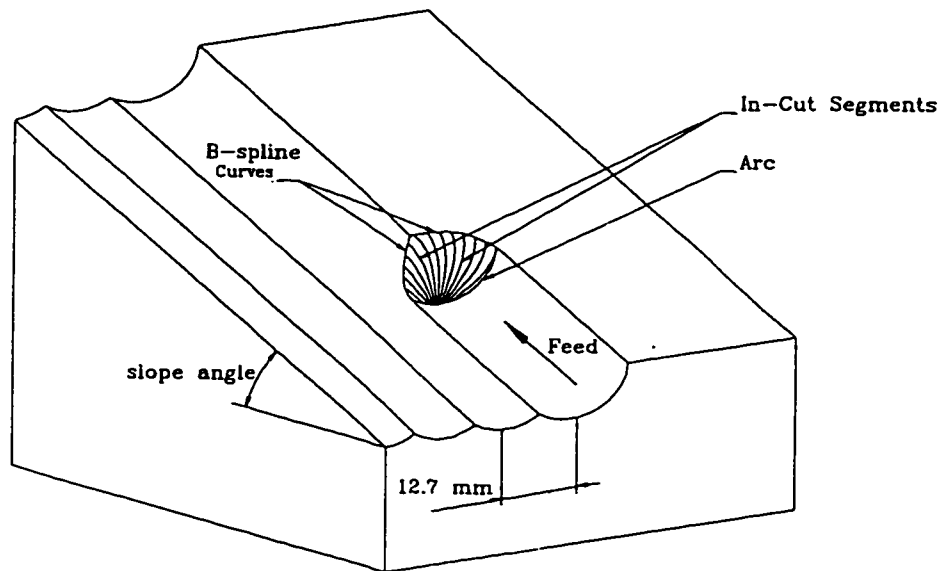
3D approach to extracting in-cut segments using contact face
